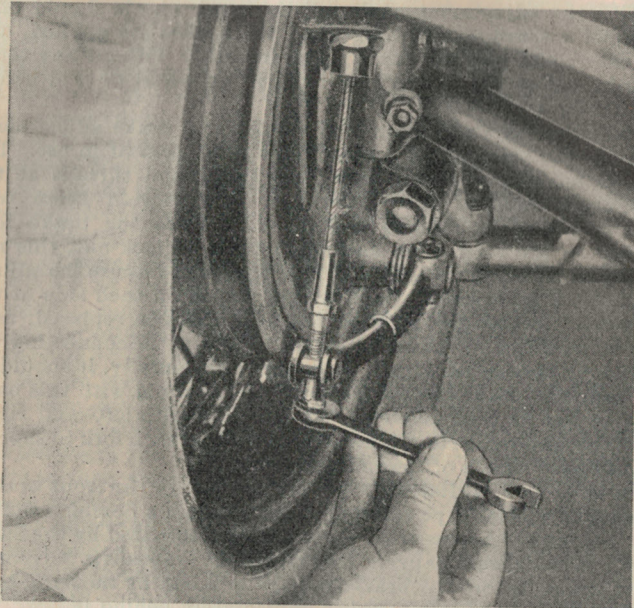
ADJUSTING A FRONT BOWDEN BRAKE CABLE
